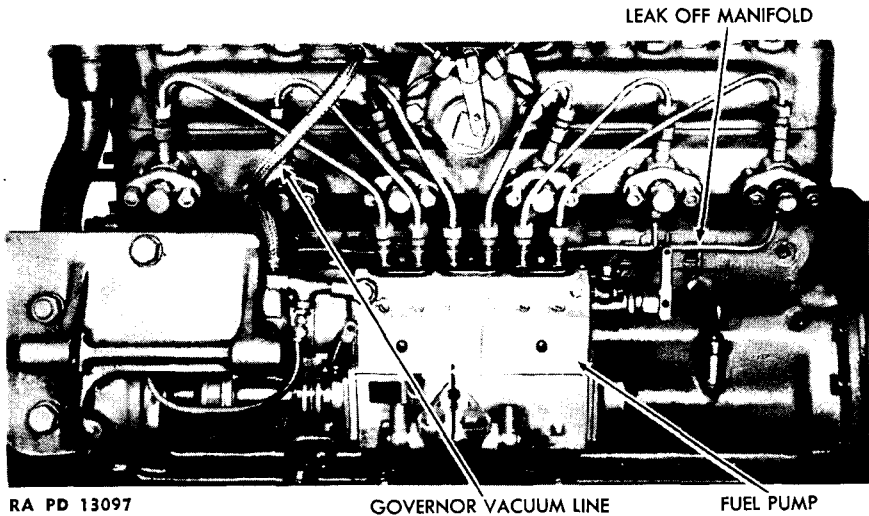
Removing Governor Vacuum Line - (Hercules Diesel)
